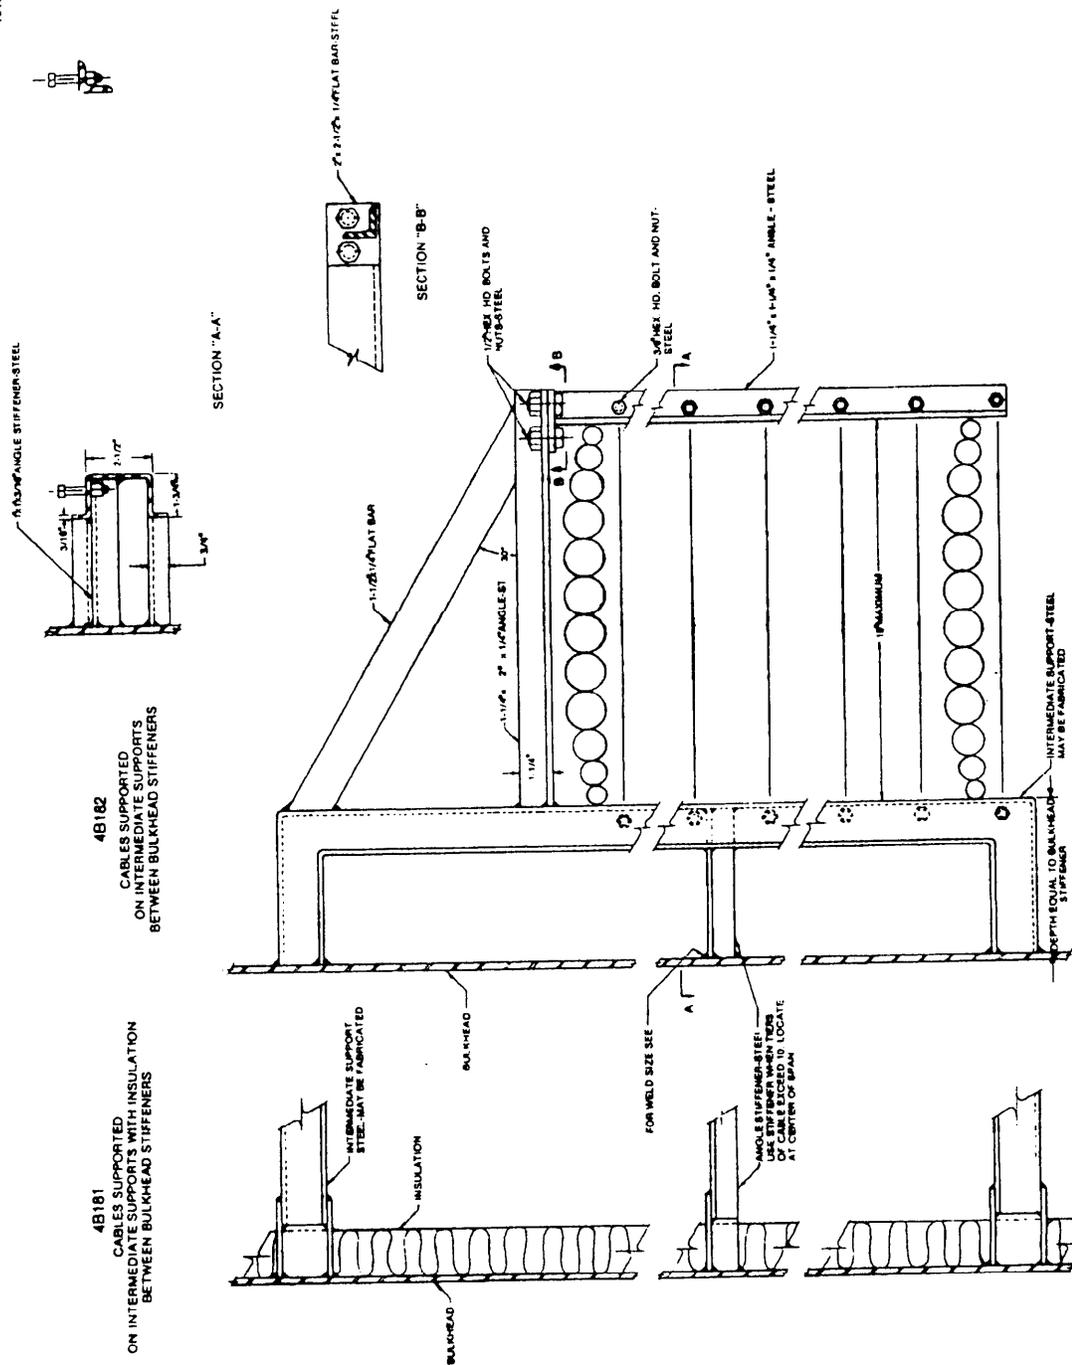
B18. Multiple cables on steel bulkheads (surface ships).
